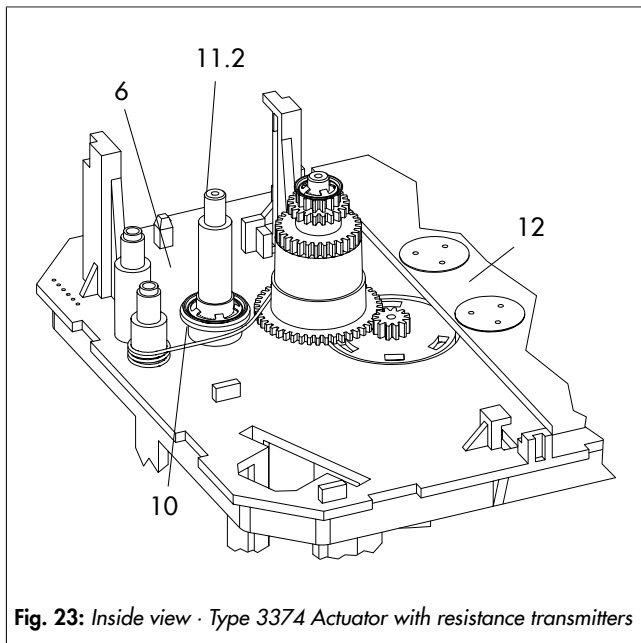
Inside view - Type 3374 Actuator with resistance transmitters
